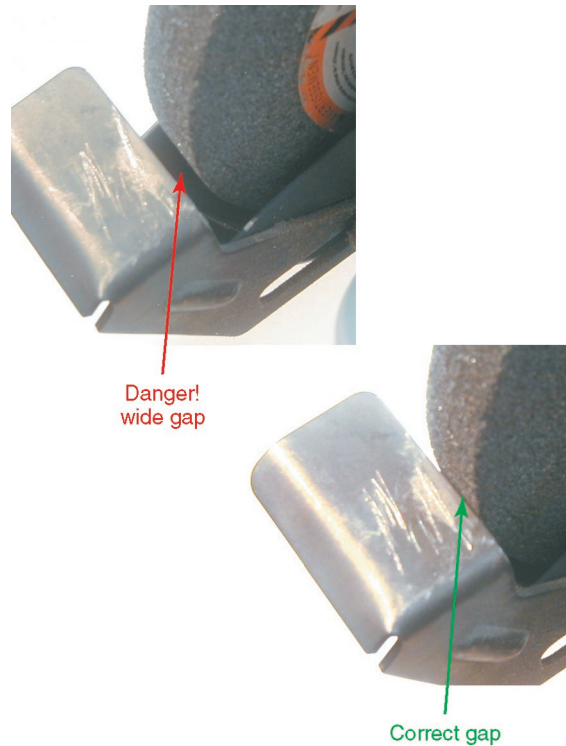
Due to grinding wheel wear, this tool rest gap has become dangerously wide and must be adjusted closer to the wheel to avoid pulling in small parts and fingers! Courtesy Mike Fitzpatrick
